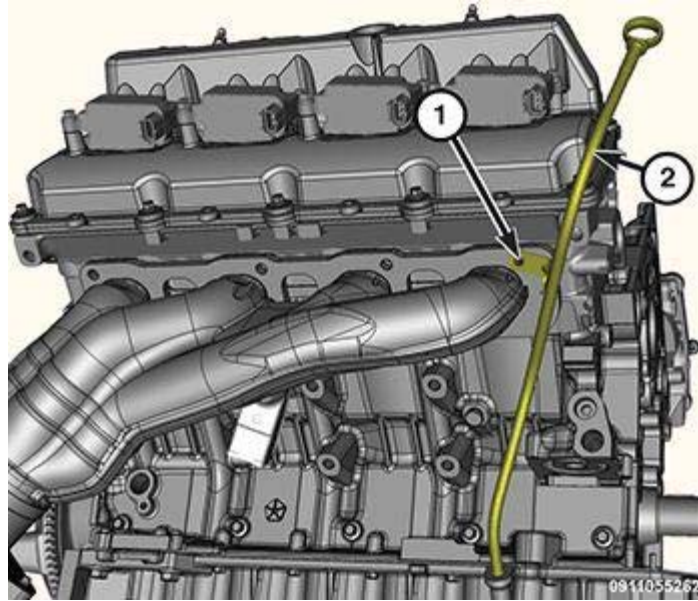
Engine Oil Tube, Dipstick & Fastener
